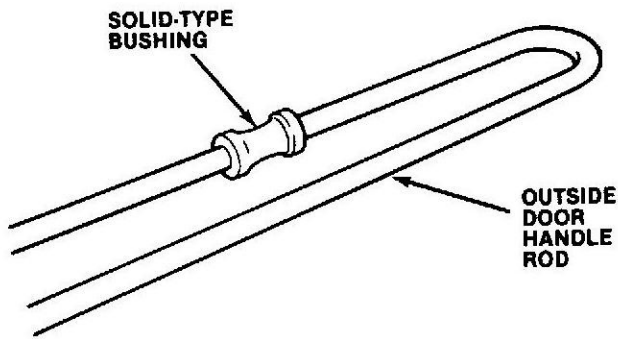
Outside Door Handle Rod and Bushing Inspection
